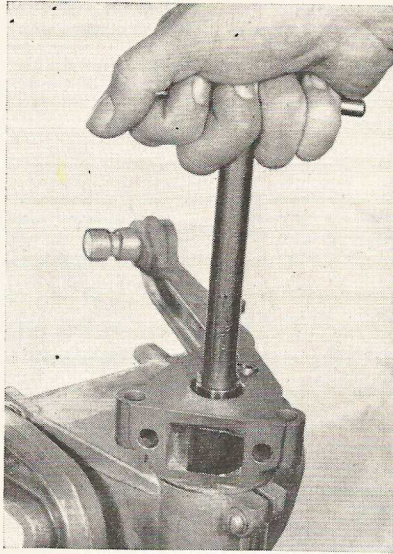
Illustrating use of tool No. S-261 for removing inner tube from drive shaft casing.
